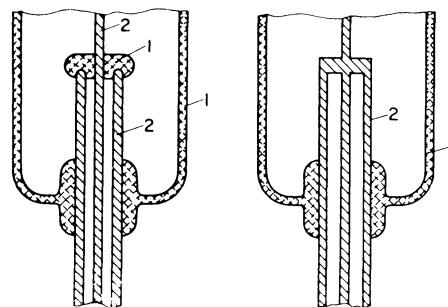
Rod seals: (a) with coaxial tube; (b) with special electrode; (1) glass; (2) Kovar.
